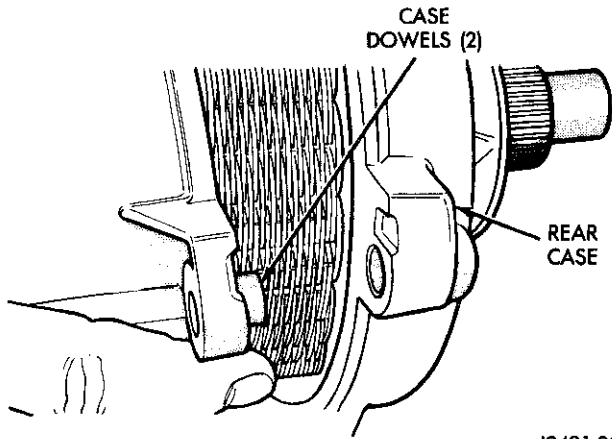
Loosening Rear Case (Breaking Sealer Bead)
